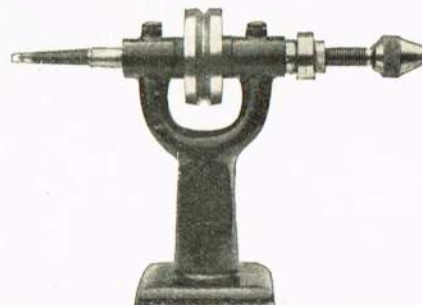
Polishing Taper Spindle, fitted with pin chuck opposite for small drills and collars for abrasive wheels. Split bearings and brass oil cups. Black and red stove enamelled.
